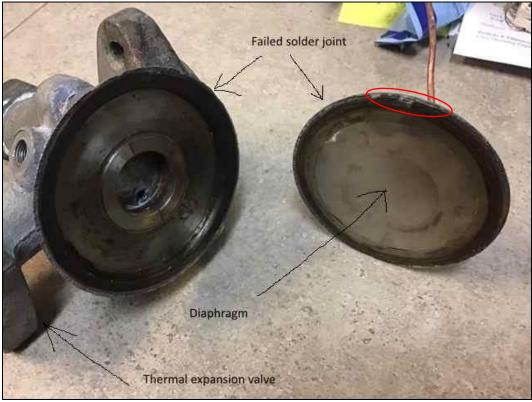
Diaphragm body separated into two pieces along the welded seam. Weld fracture appears as shiny metal, circled, compared to darker corrosion surfaces on either side.
